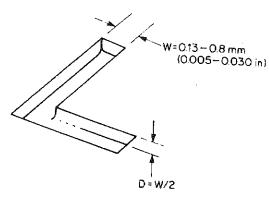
Dimensional rules for depressed lettering which is to be filled with paint.
